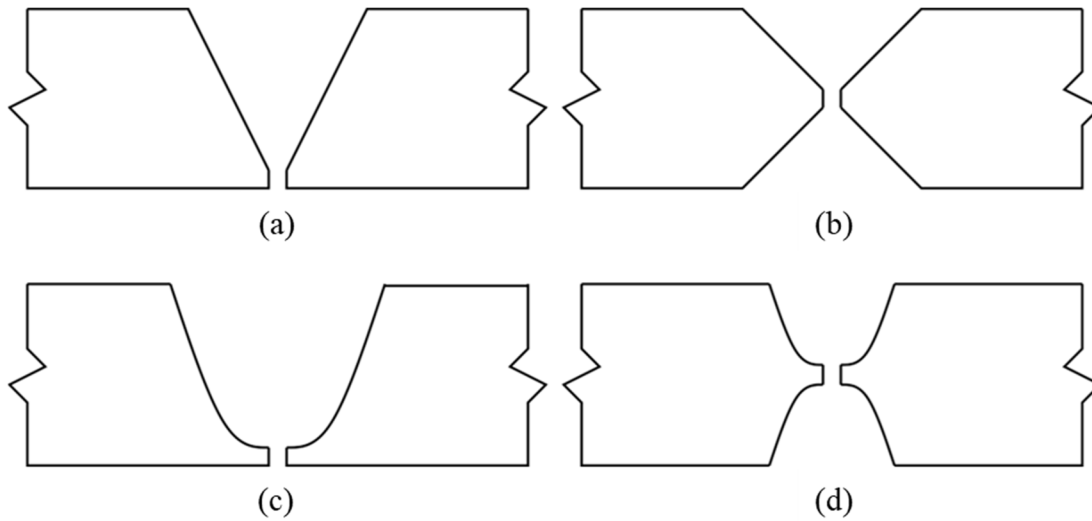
Common edge preparations for butt joints including (a) single-V, (b) double-V, (c) single-J and (d) double-J
